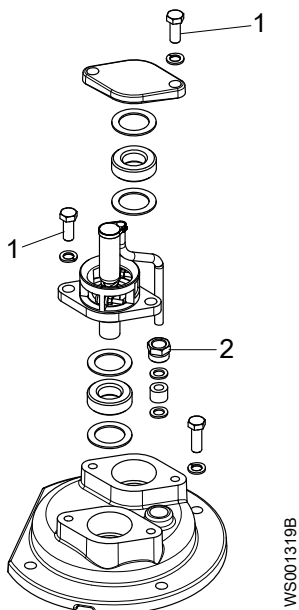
Cable entry for version code 2190.010 HT and 2201.012 HT
